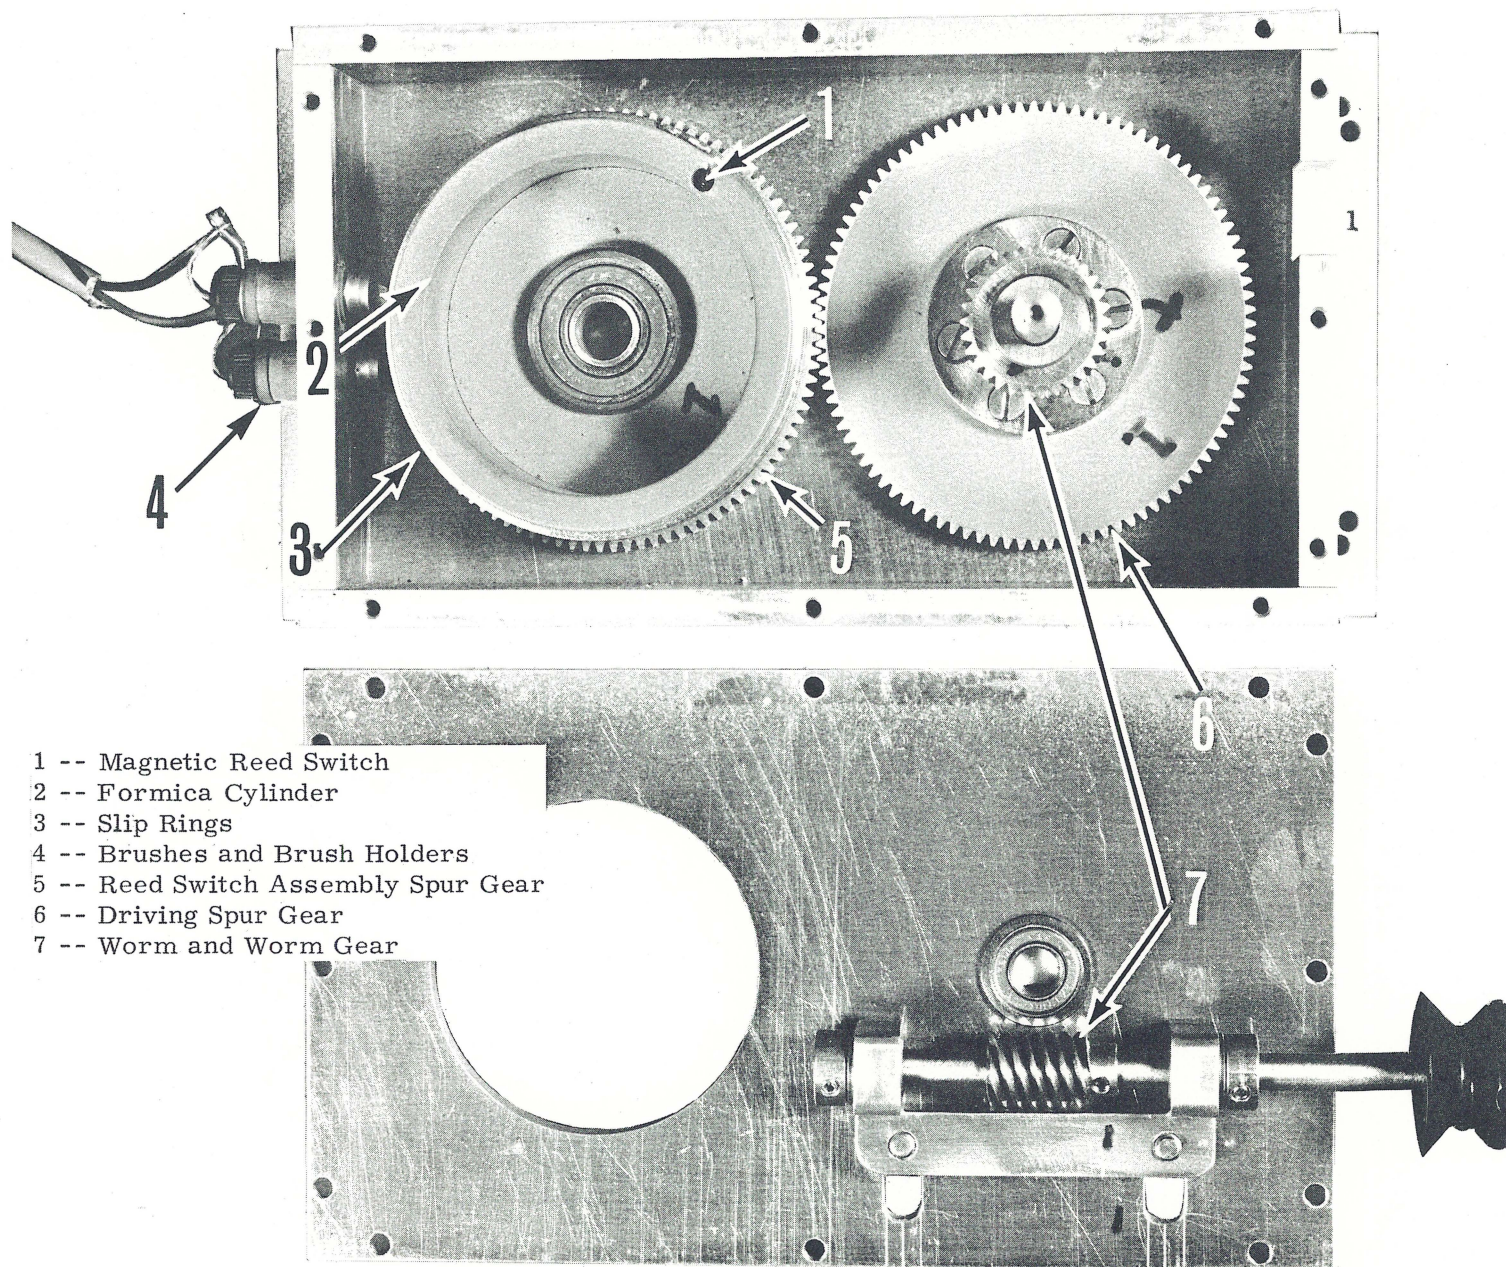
Trigger Assembly with Front Cheek Plate Removed.
